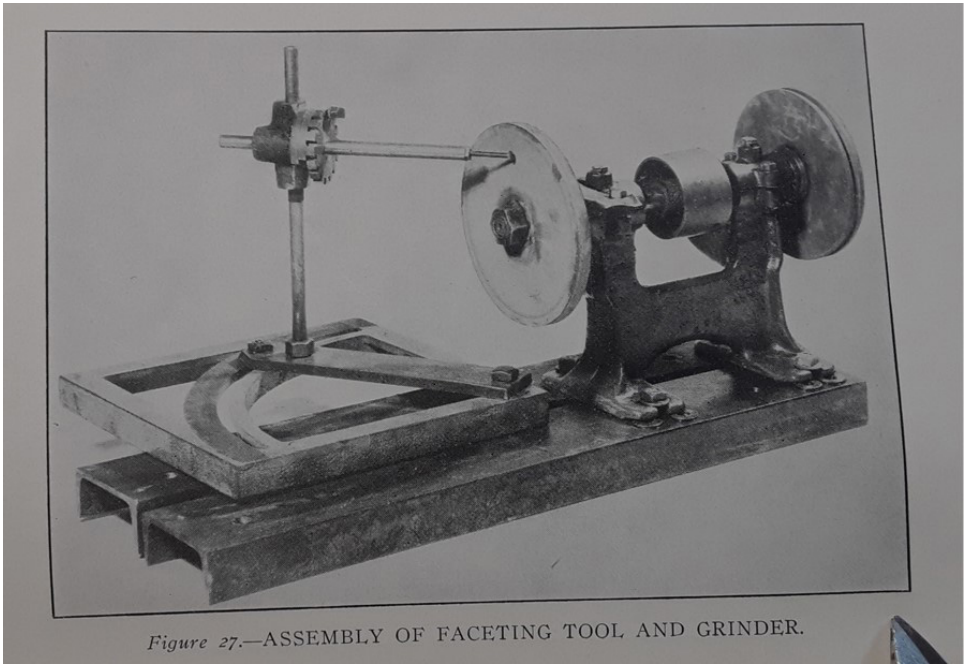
ASSEMBLY OF FACETING TOOL AND GRINDER.
